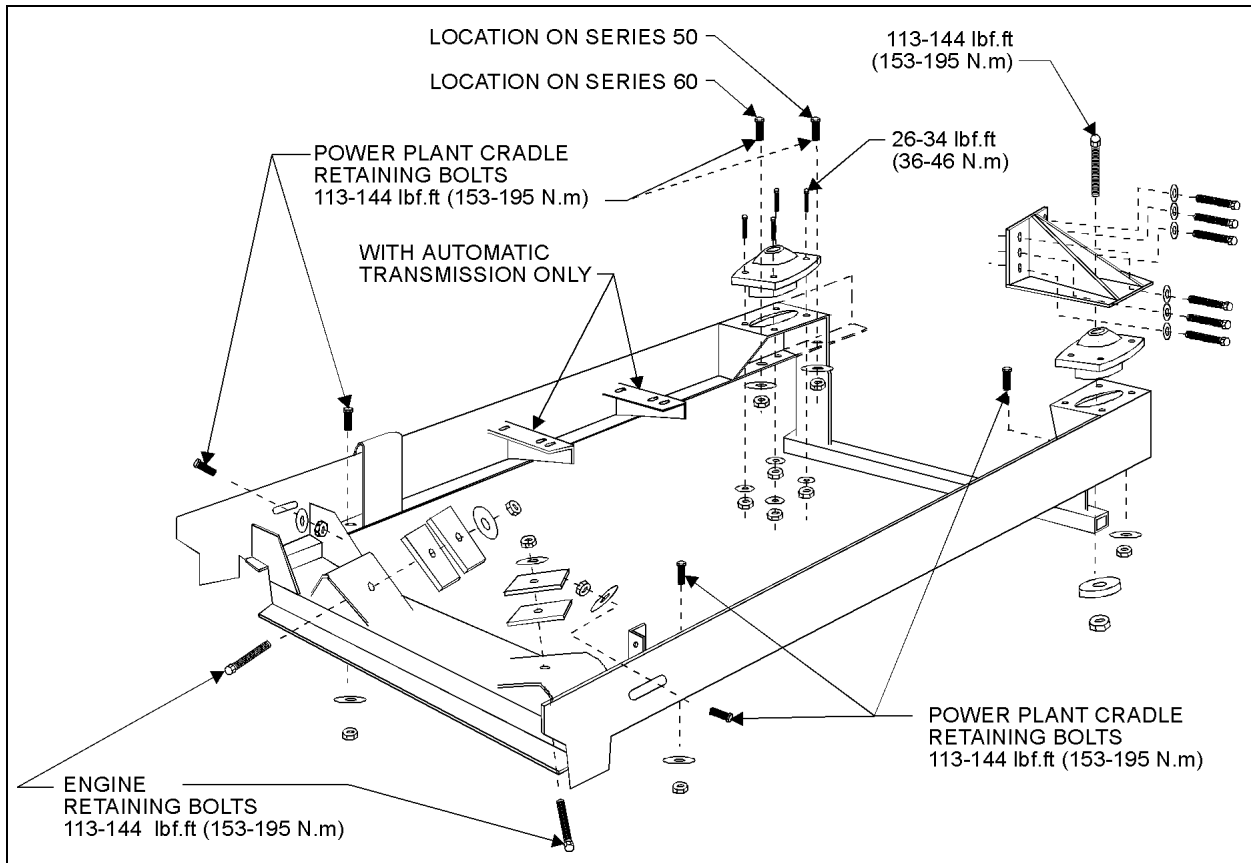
POWER PLANT CRADLE INSTALLATION
